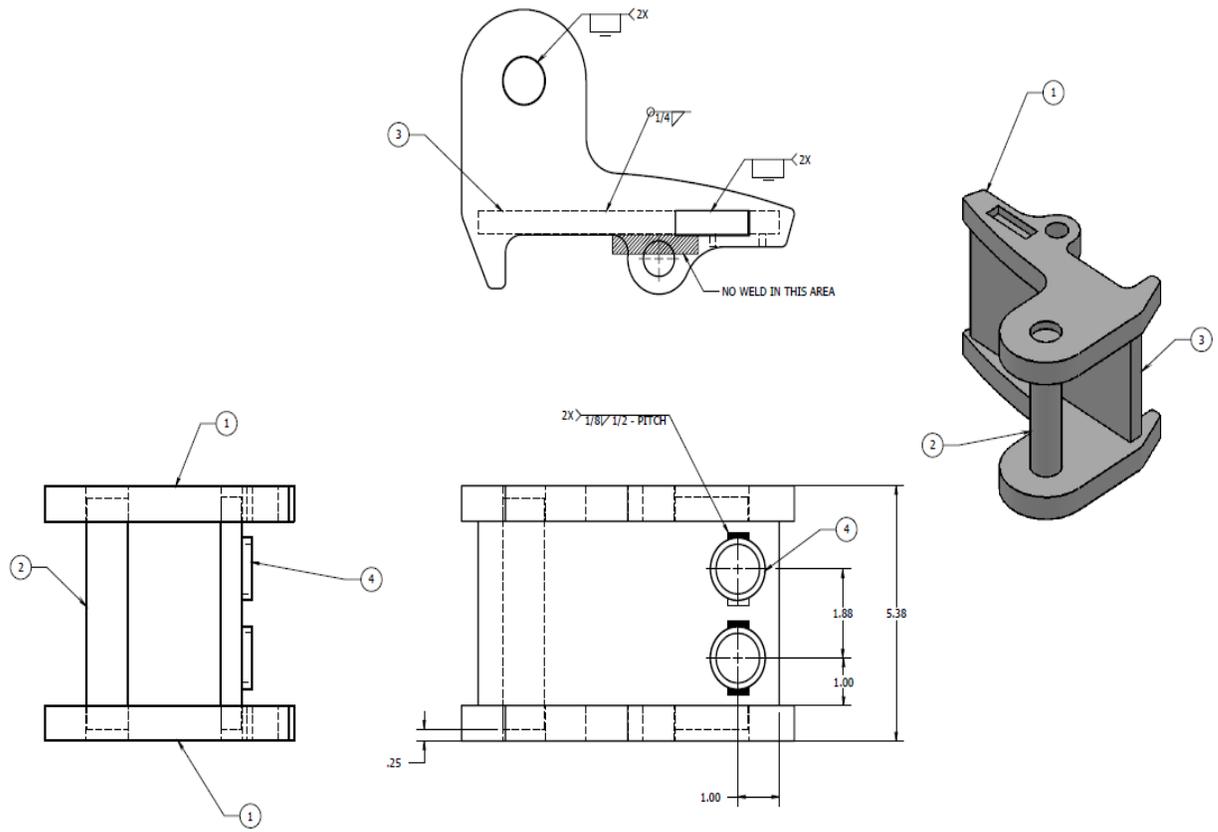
Example Tong Assembly Body 3D CAD model [86]
